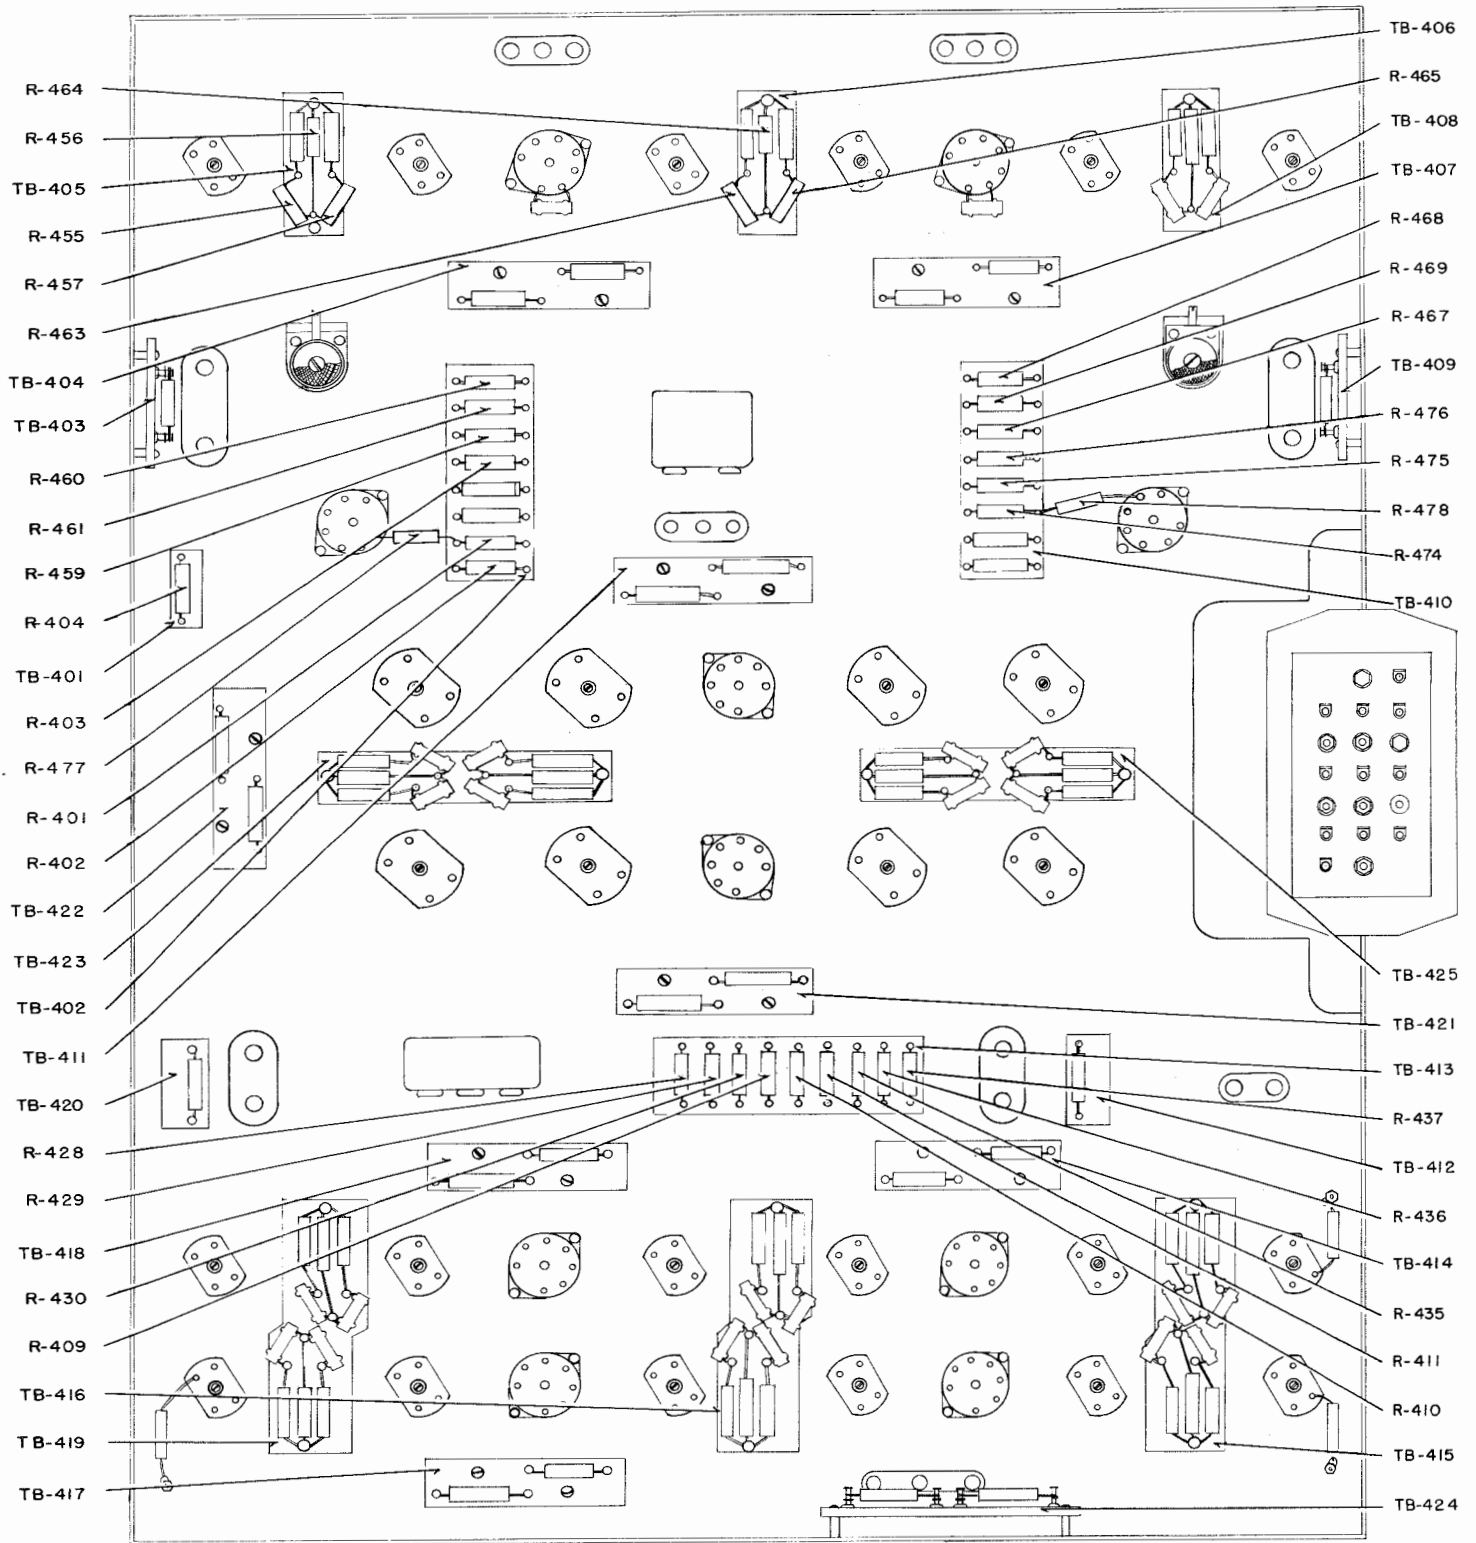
Resistor and Terminal Board Locations Bottom of Chassis, Filter Assembly F-99/FRR-24
